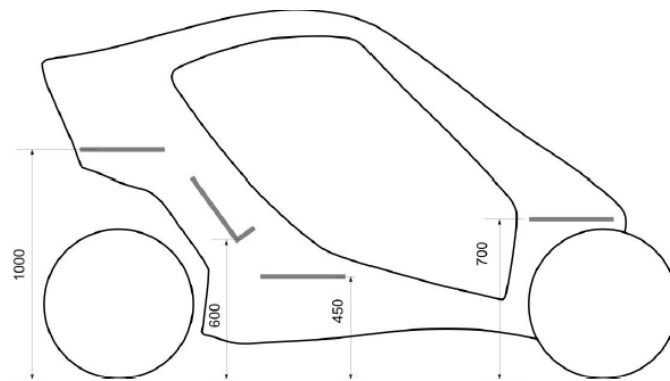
Sketch of the installation positions at the demonstrator (dimensions in mm)
